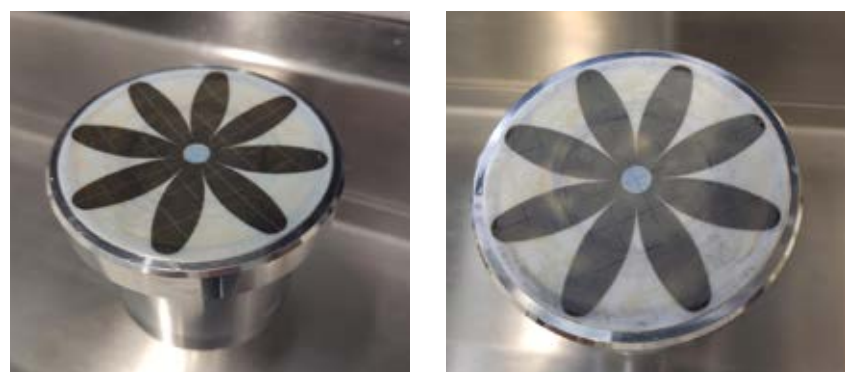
Preparation of a novel GRIN pad polishing tool including dressing of the tool for a uniform surface structure with the required radius; left: before dressing, right: after dressing
